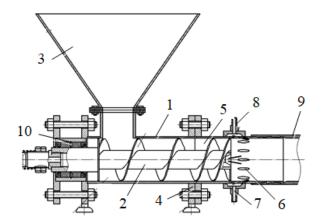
Structural diagram of a pneumatic screw conveyor: 1 – casing (guide pipe); 2 – screw; 3 – hopper; 4 – flange; 5 – housing; 6 – nozzle; 7, 8 – fitting; 9 – pneumatic hose; 10 – screw drive
